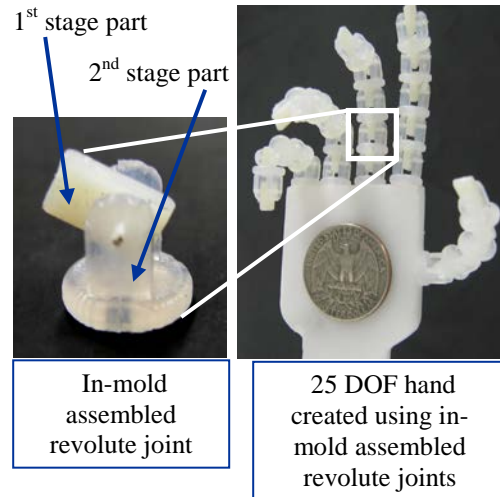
Fabricating a robotic hand using mesoscale in-mold assembly
